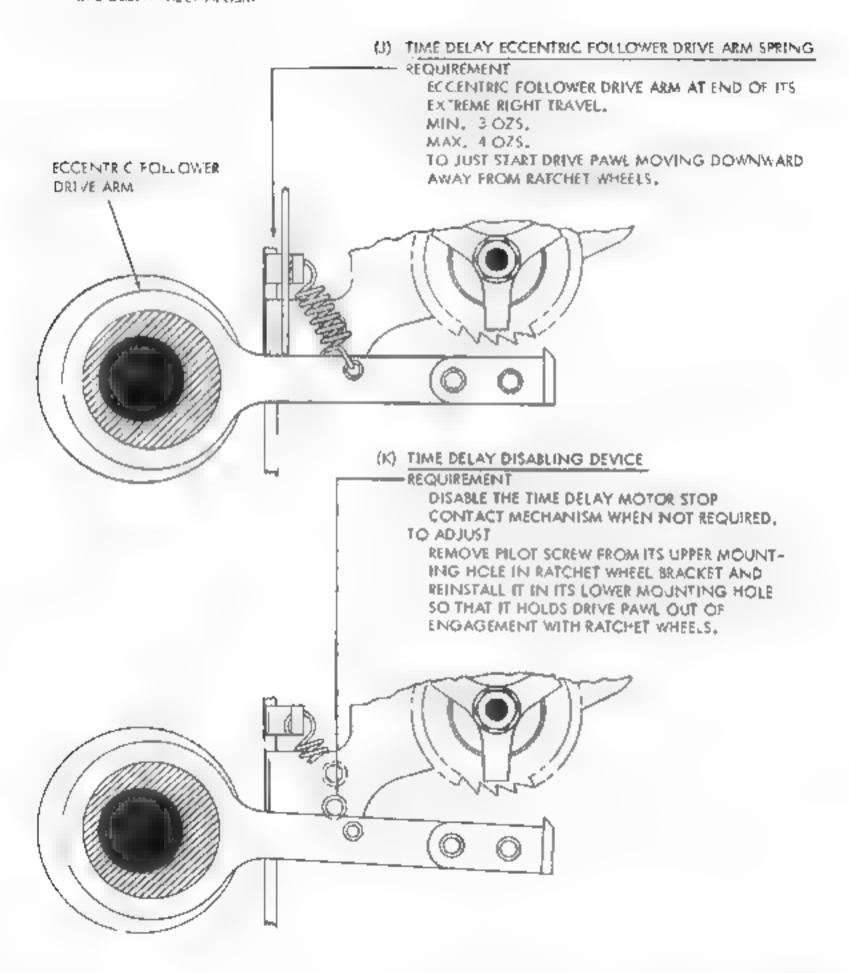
TIME DELAY MOTOR STOP MECHANISM
